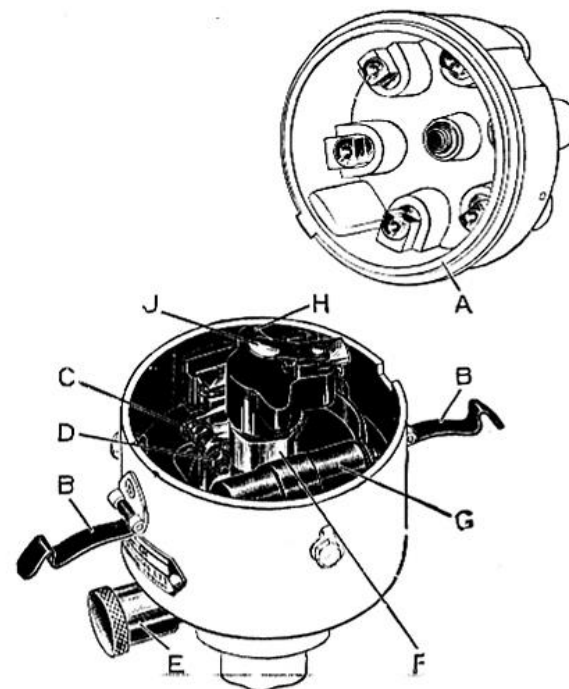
DISTRIBUTOR and CONTACT BREAKER TYPE DF6A.
